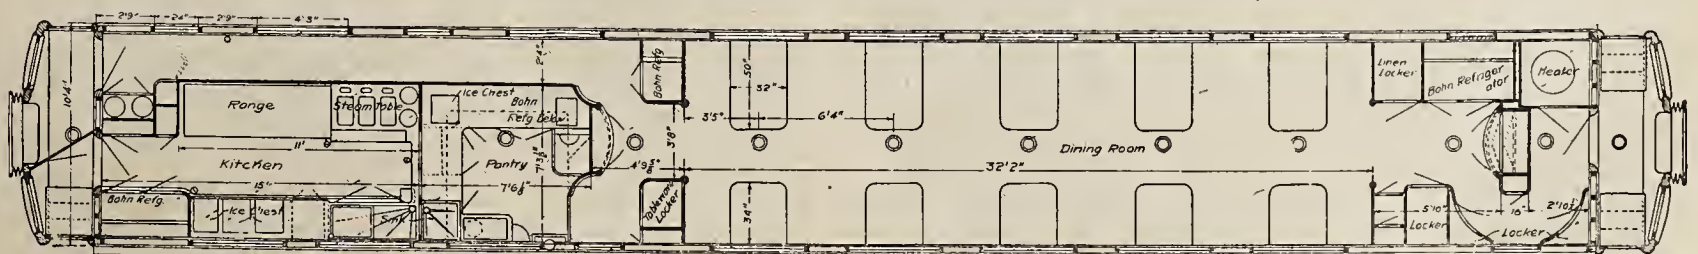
FLOOR PLAN OF DINING CAR FOR THE C., B. & Q. Ry.
